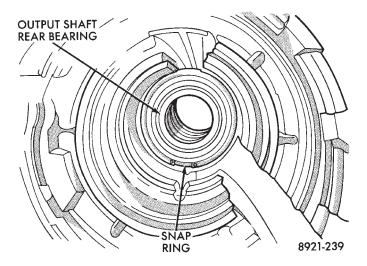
Output Shaft Rear Bearing And Snap Ring Location
